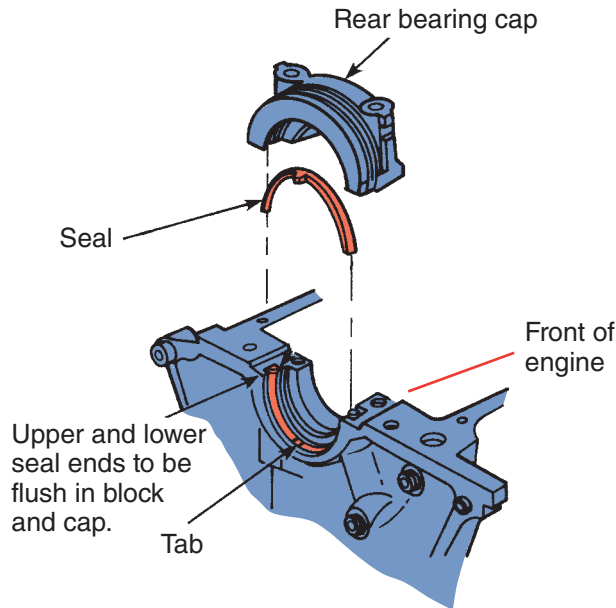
Typical two-piece rubber rear crankshaft seal.
